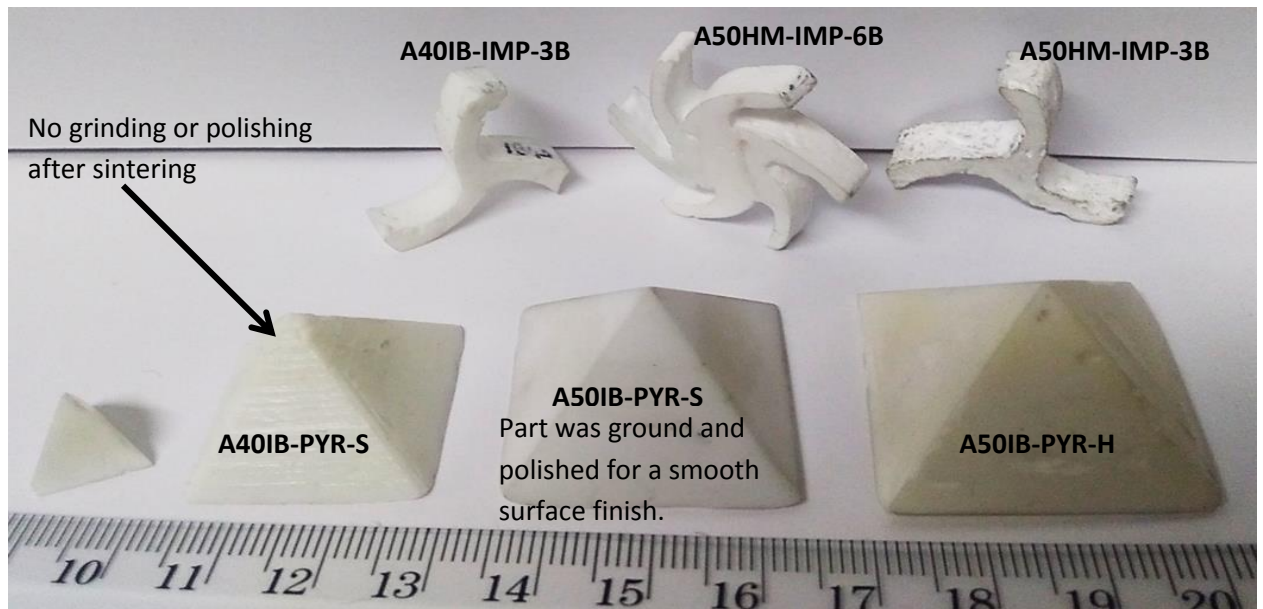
Illustration of different pyramid shapes (solid and hollow pyramids) and sizes that were produced by gelcasting using 3D printed moulds.
